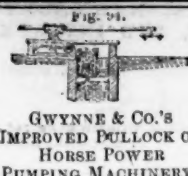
Gwynne & Co's Improved Pullock or Horse Power Pumping Machinery.
